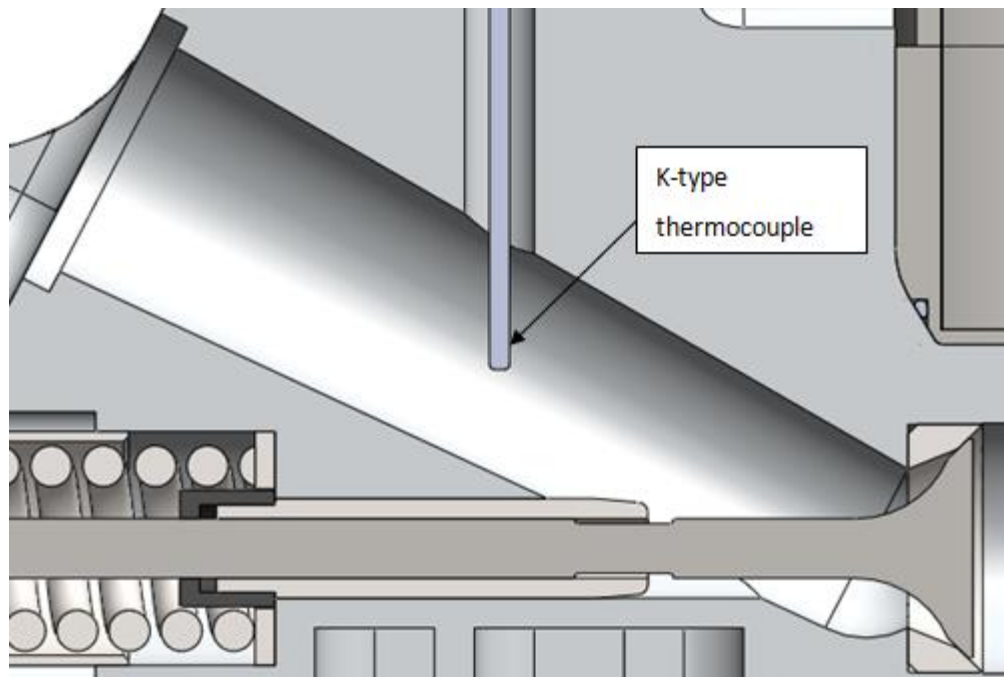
Cross-sectional view of exhaust port showing the thermocouple location.
